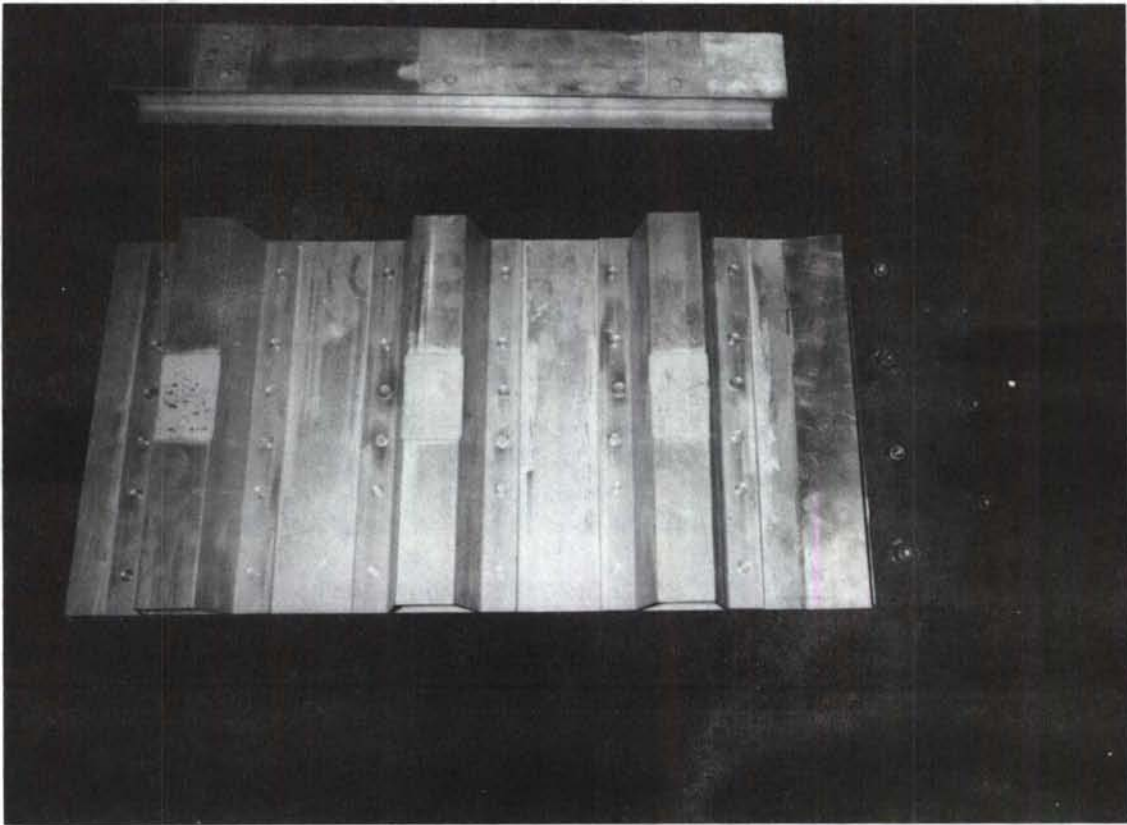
WELDBOND "HAT" TEST PANEL AFTER FAILURE (WELDBOND BETWEEN HAT CROWN AND RIB CAP PULLED APART)
